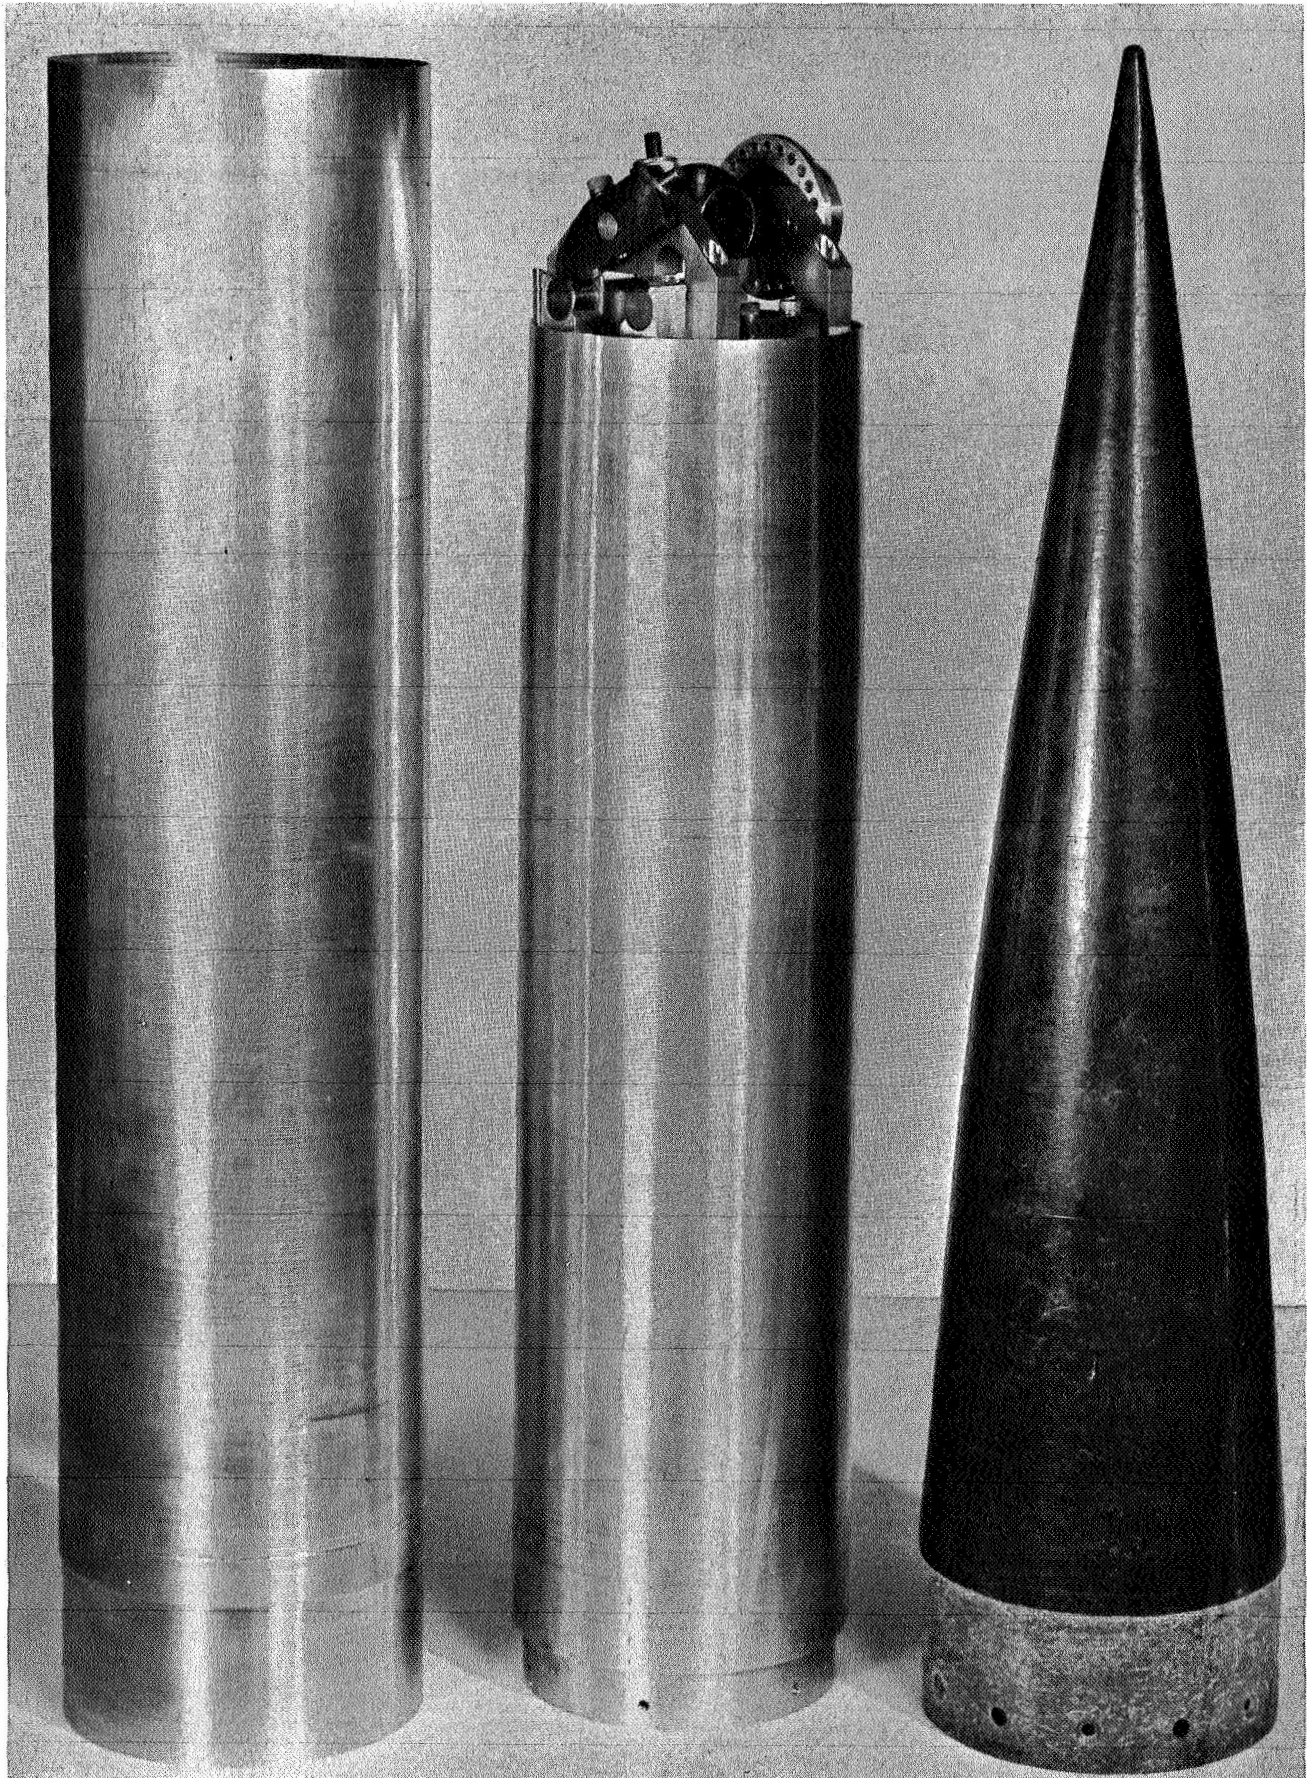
Unassembled Sampler. Left - Protective Shield. Center - Pump-Dewar Assembly. Right - Nose-Cone.
